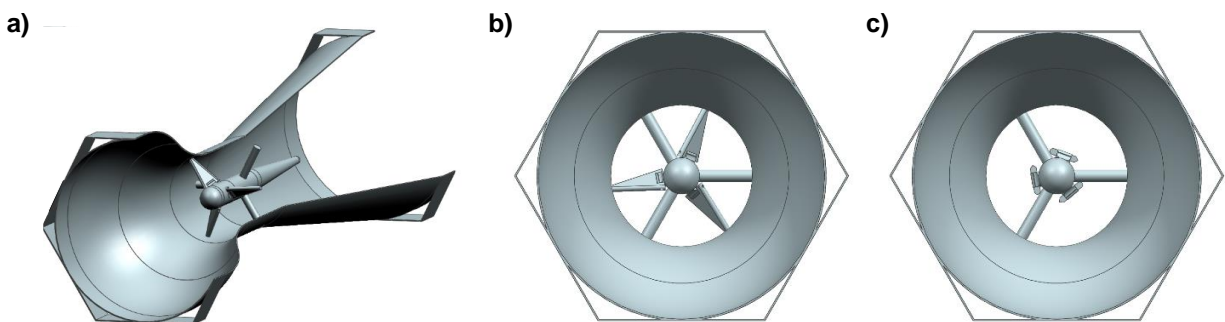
An example illustration of a single turbine “micro” unit. a) An example ducted direct-drive turbine. Downstream view with b) operating and c) folded blades in to the page. Blade geometry is for illustrative purposes only.
